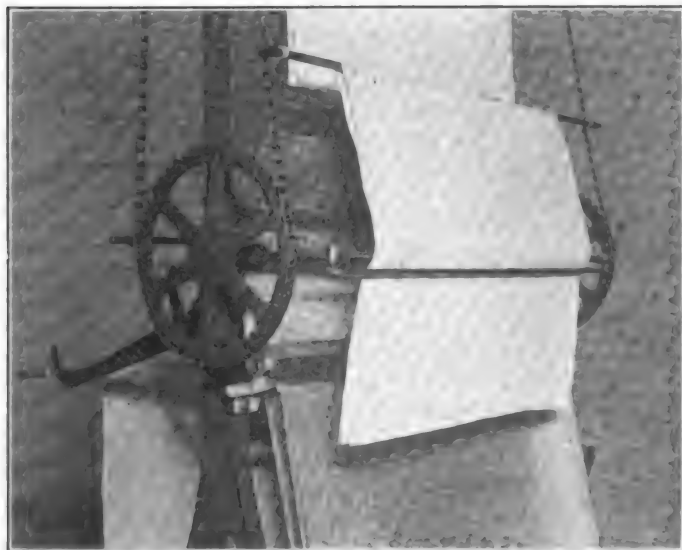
PRINT PASSING THROUGH WIPING DEVICE.
